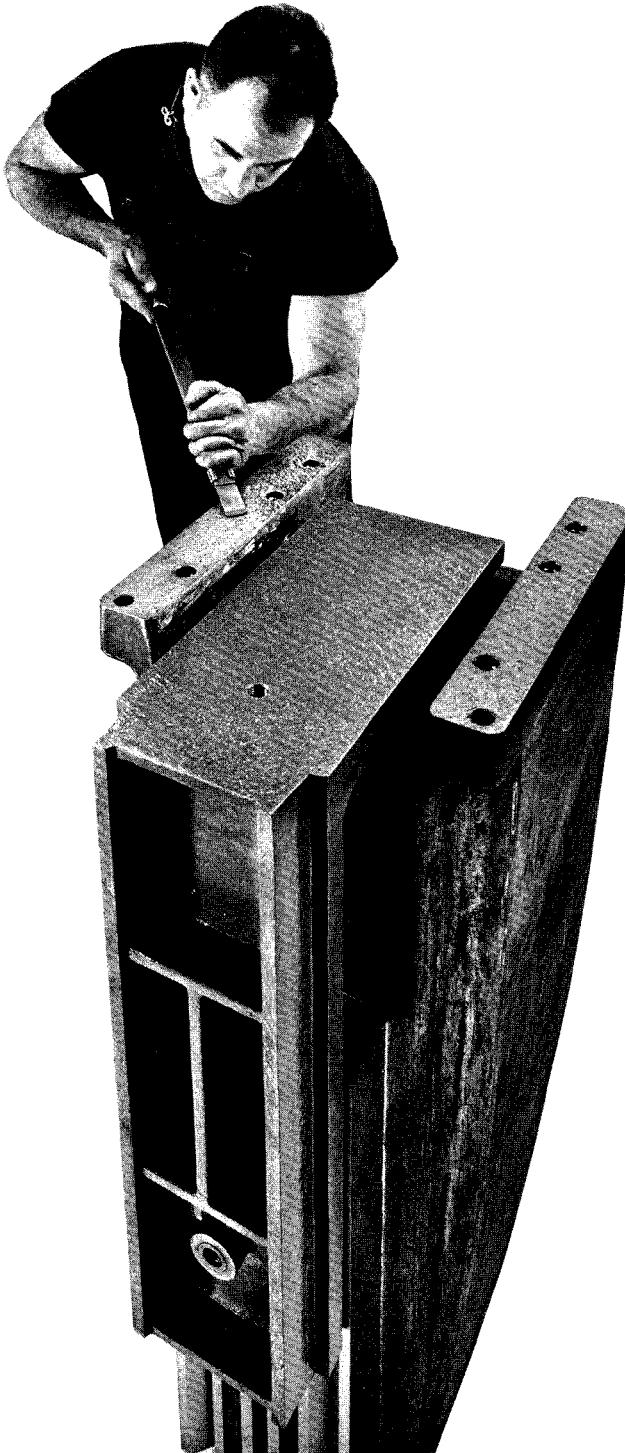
The column is inverted and its mounting surface to the base is scraped roughly flat and square to its own V's. A special squaring master is fastened to the column V's and used as a datum from which to measure.
